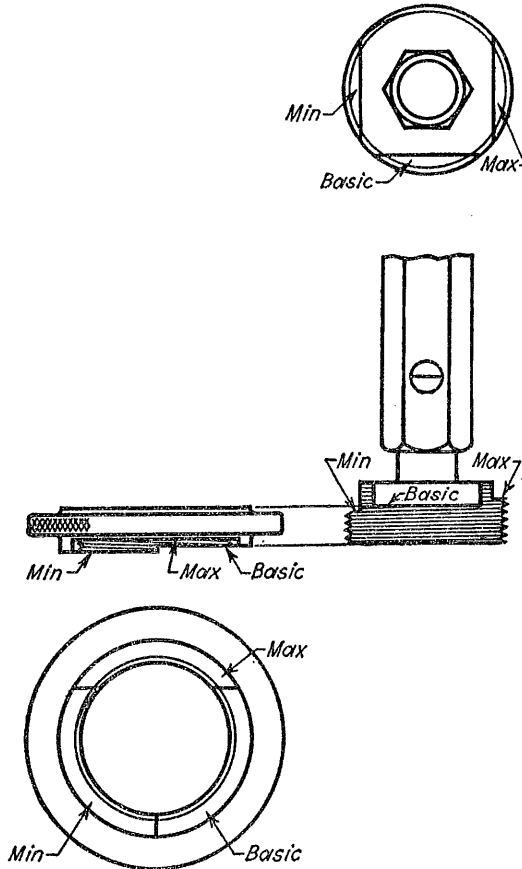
Alternative form of taper pipe thread plug and ring gages, limit type.
